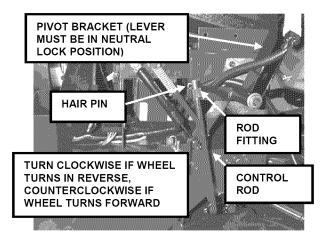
(Right side shown; fuel tank removed for clarity)
